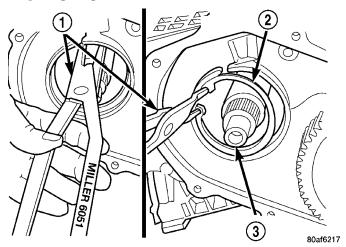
Install Transfer Shaft Bearing Snap Ring
